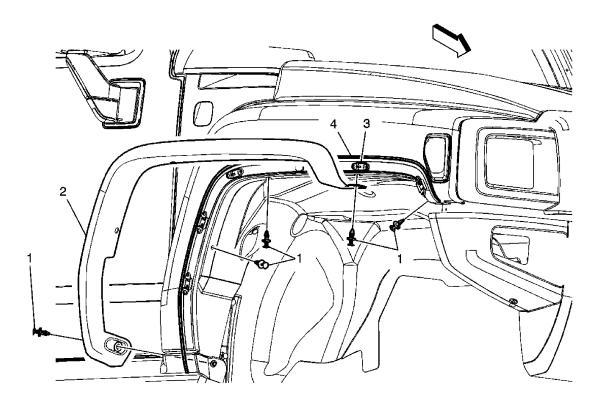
View Of Front Wheel Opening Flare (With BRM & RHD) Courtesy of GENERAL MOTORS CORP.
